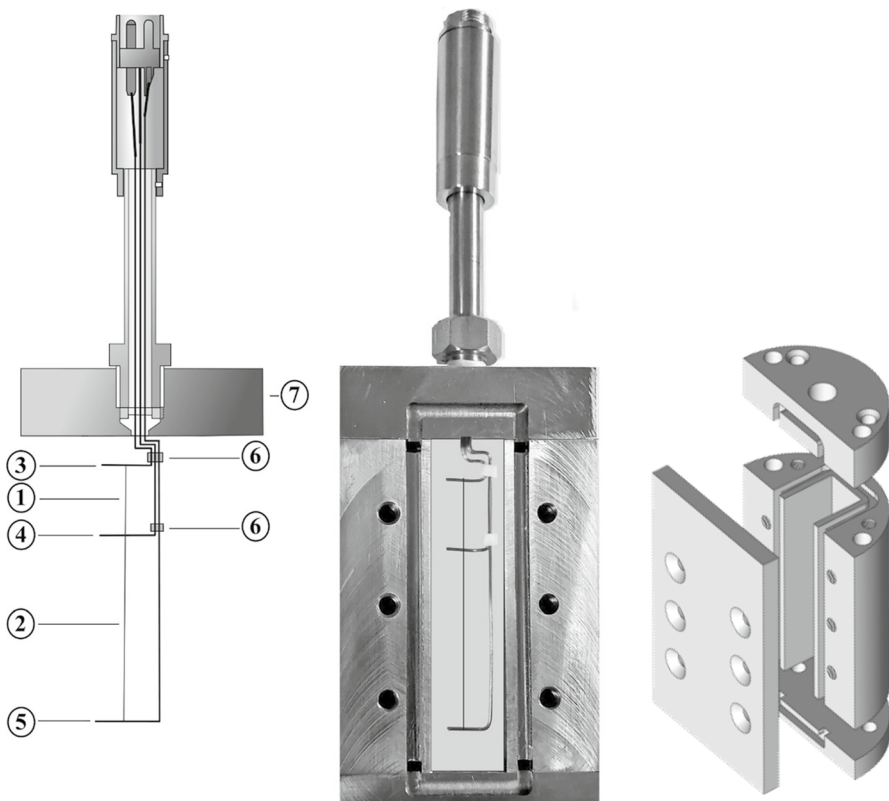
Schematic diagram of wires, actual wires in the shell, and the shell decomposed
